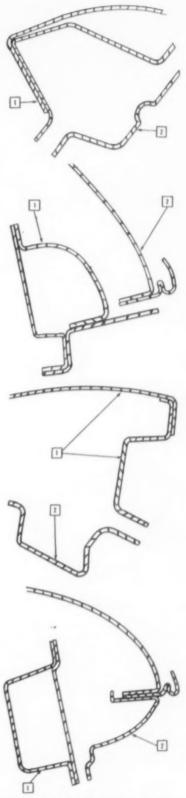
Cross-section view at top of windshield, showing roof panel and windshield header front bar assembly which is welded to the windshield header rear bar on all models: 1. roof panel and windshield header front bar assembly and 2. windshield header rear bar.
